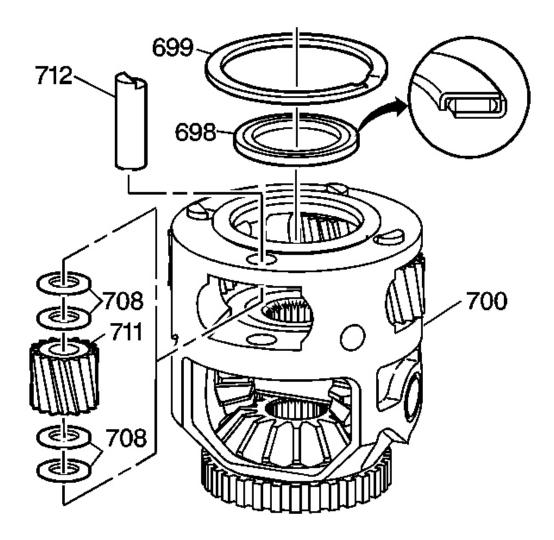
Installing Differential Carrier Sun Gear Thrust Bearing Courtesy of GENERAL MOTORS CORP.
